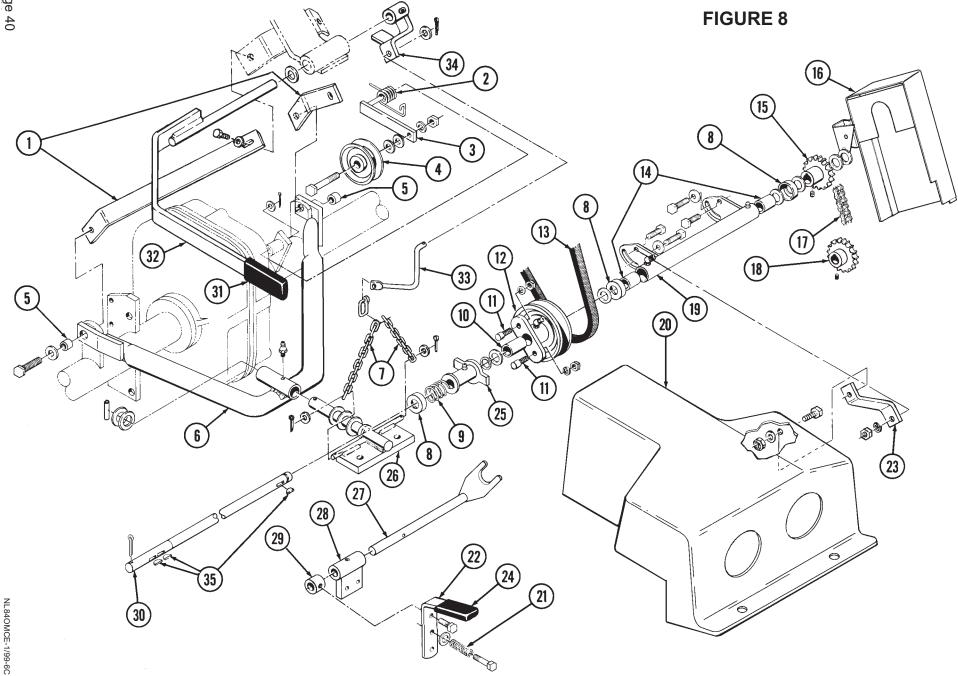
REAR MOWER LIFT & DRIVE PARTS
